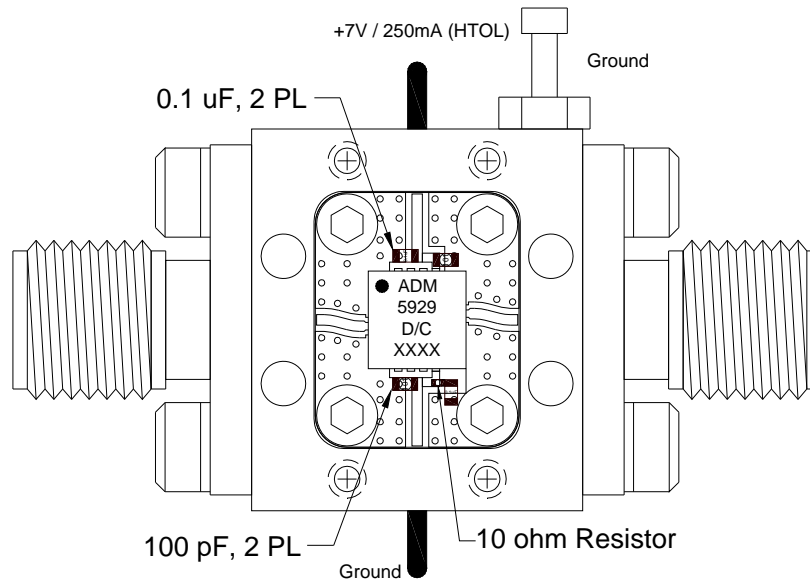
A mounted sample in a custom test fixture designed to facilitate HTOL test. Bias voltages used are shown.
